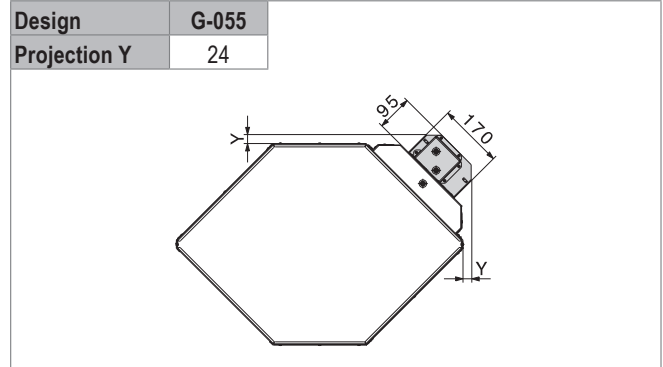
Diagram showing dimensions of Gotthard (in mm)
